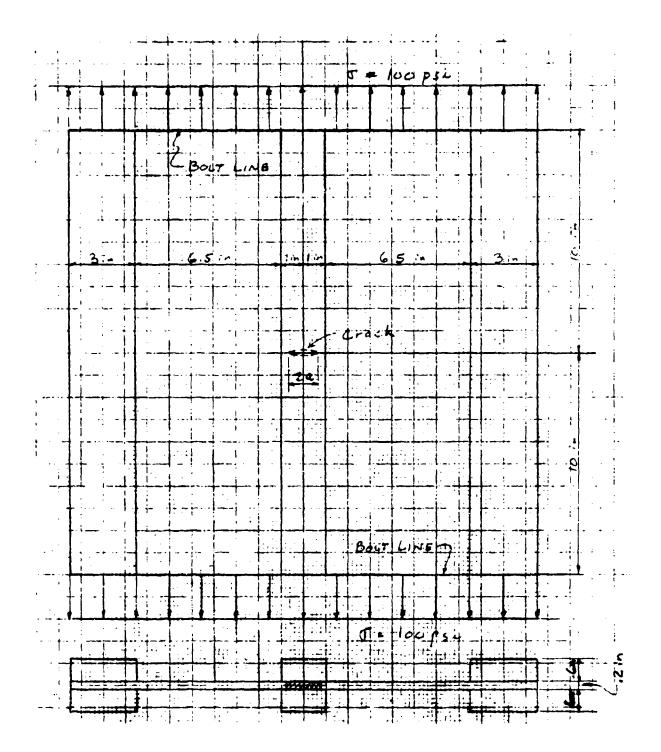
IDEALIZED FAIL-SAFE INTEGRAL LOWER PLATE
